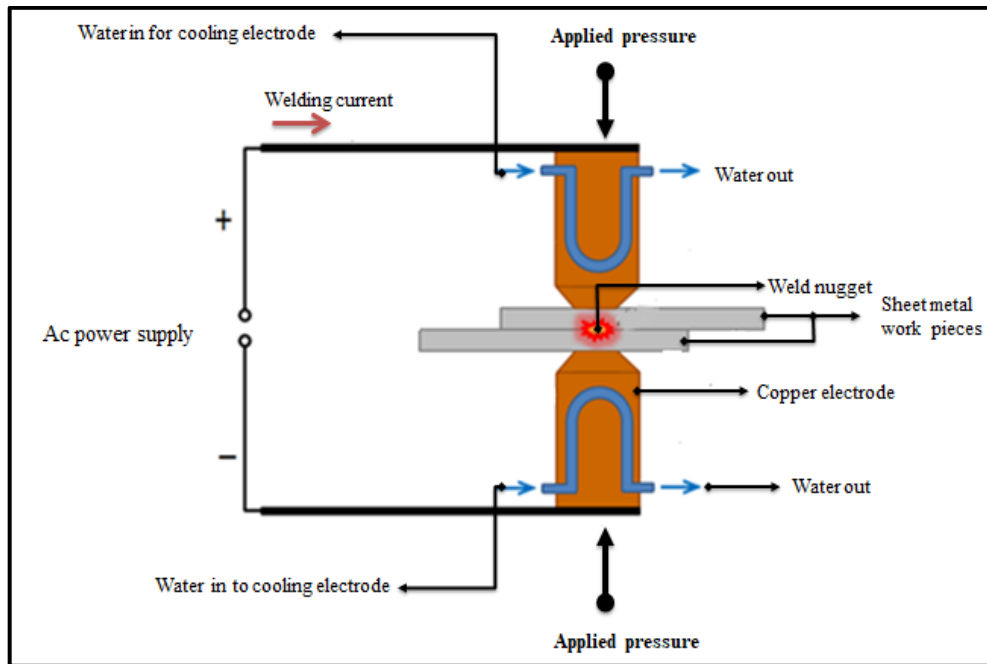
The spot-welding technique, (Watmon et al., 2020)
